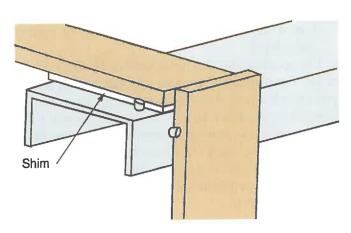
Add a shim to protect the jig when making through multiple dovetails.
